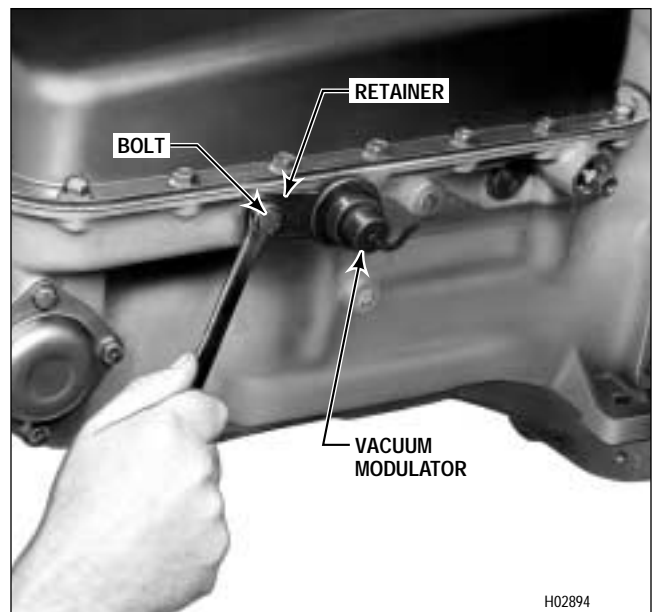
Removing Vacuum Modulator Retainer Bolt
